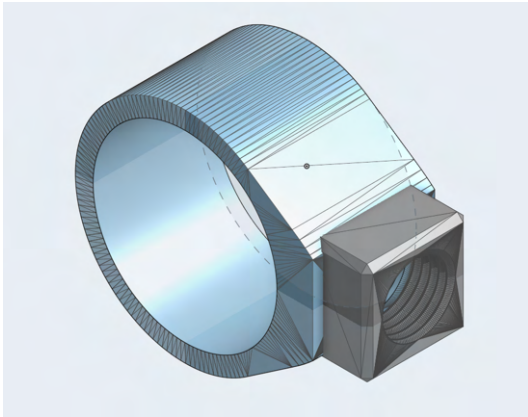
CAD model of the adapter that is fitted on the cylinder.
